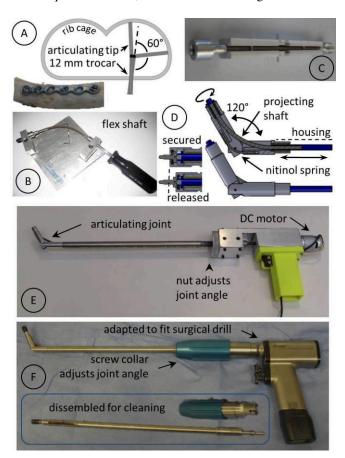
Thoracoscopic screwdriver design from need to final prototype.
